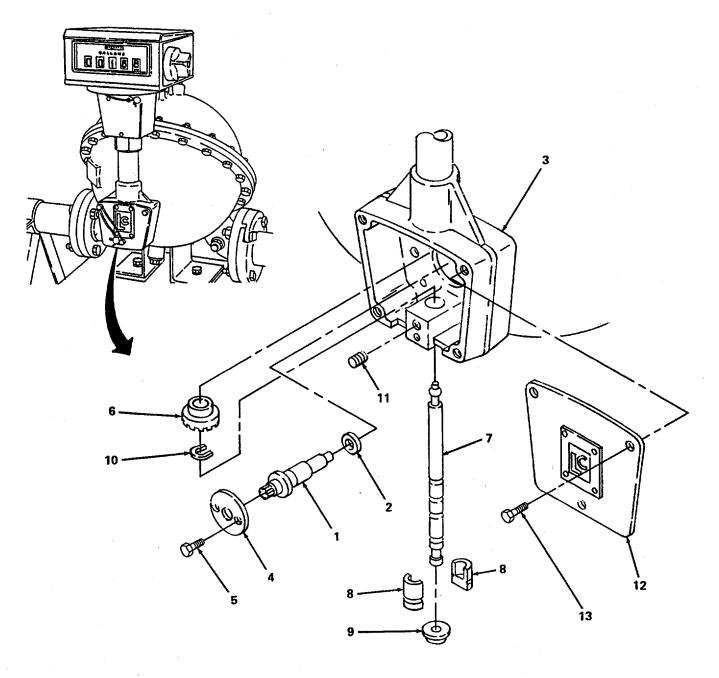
Flow Meter Packing Gland Assembly Installation.
